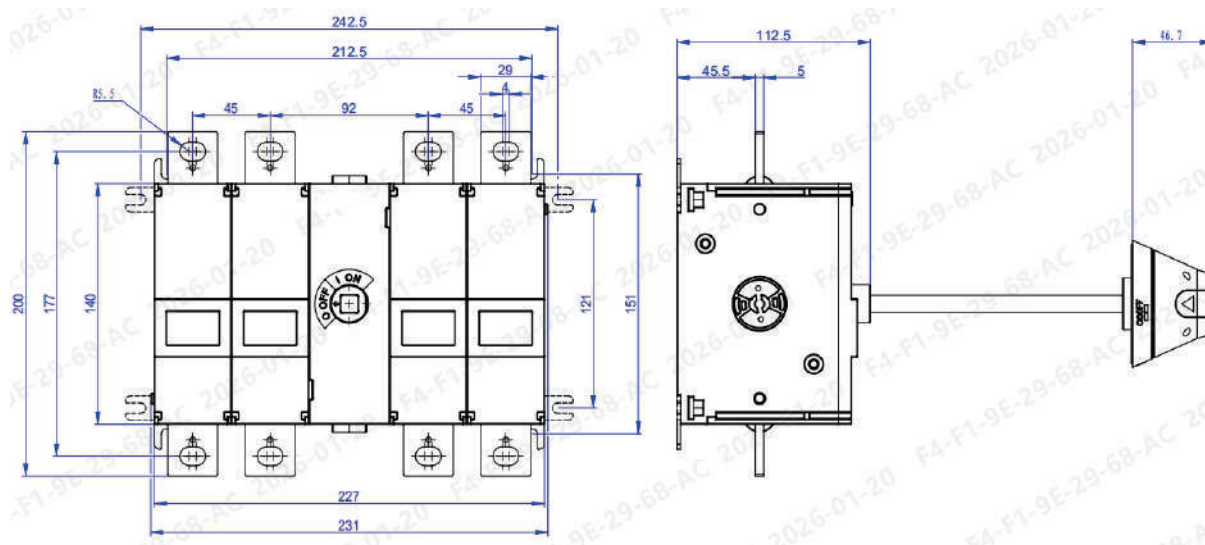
Outline Dimensions of Front Handle Outside the Cabinet
